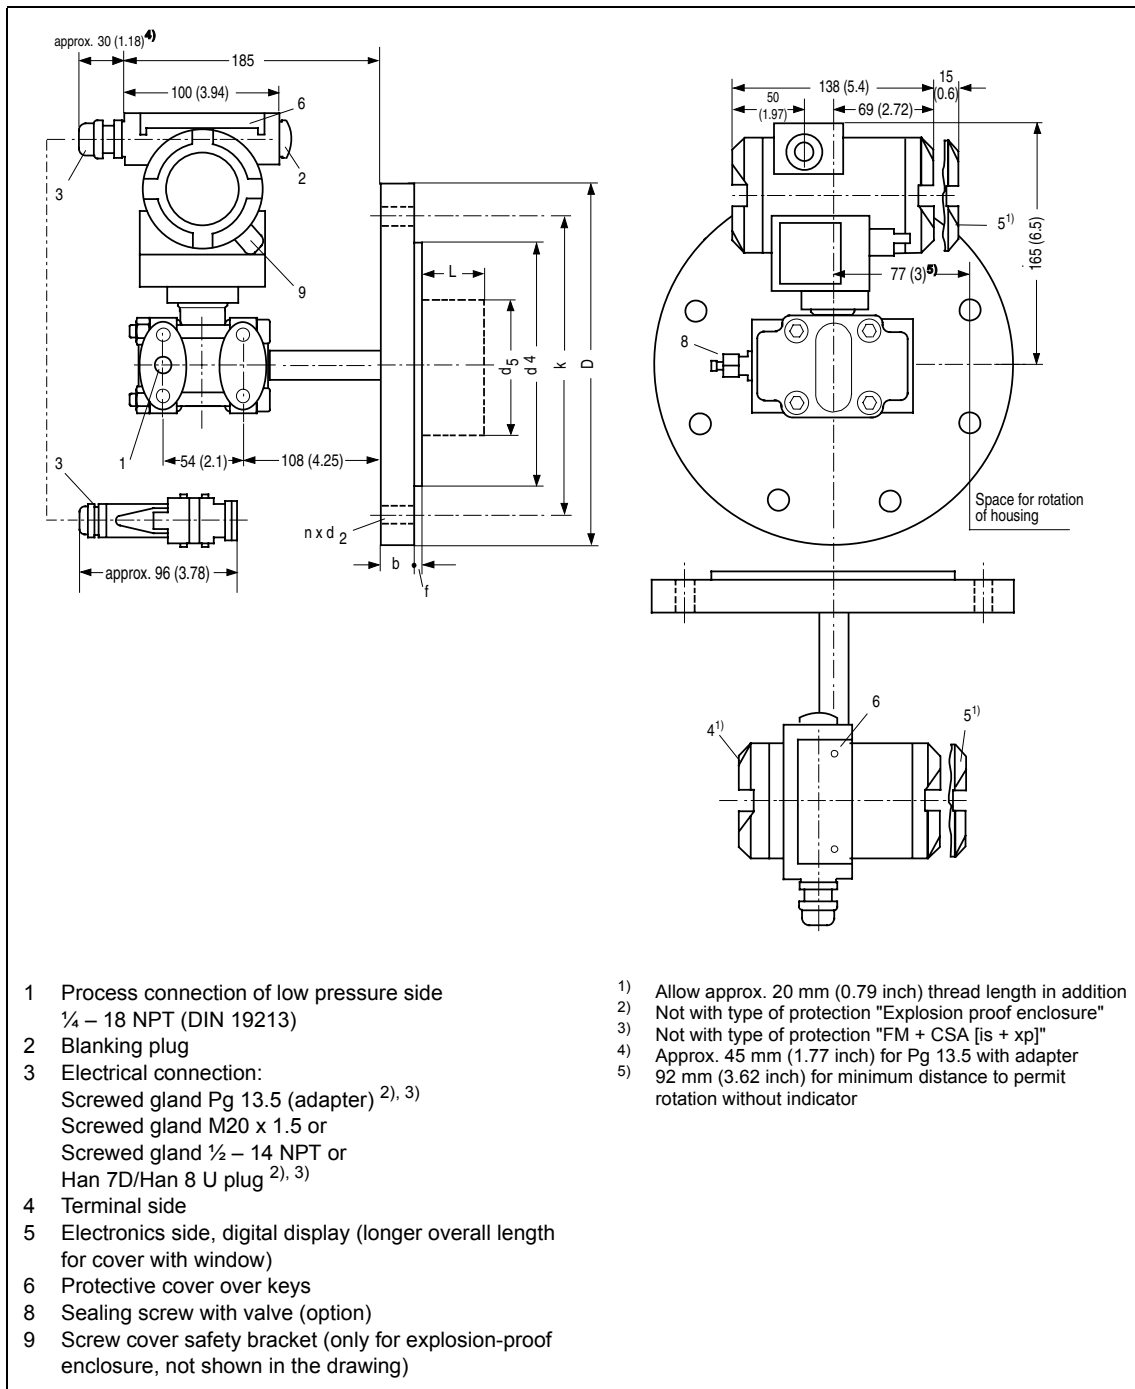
DS III series for level (transmitter including mounting flange), dimensions in mm (inches)
